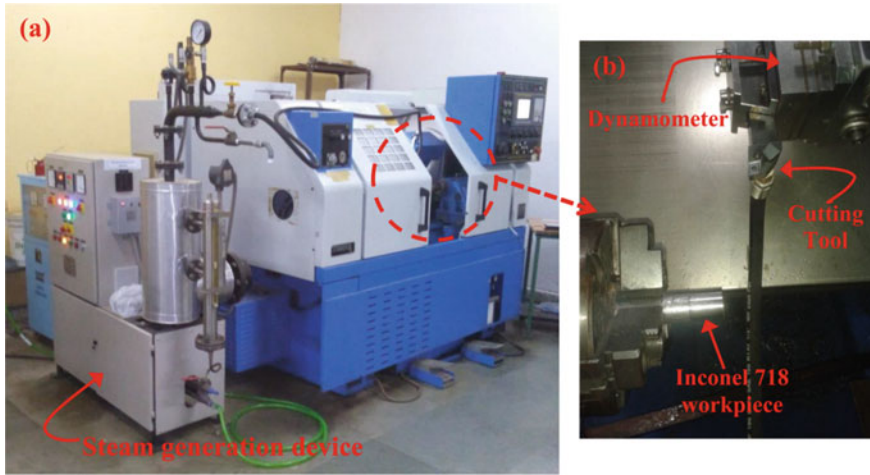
a Steam generation device and cutting fluid water vapour's supply in the zone of machining of CNC turning lathe from hose, and b Jet of water vapour precisely directed onto insert tip through special tool holder
